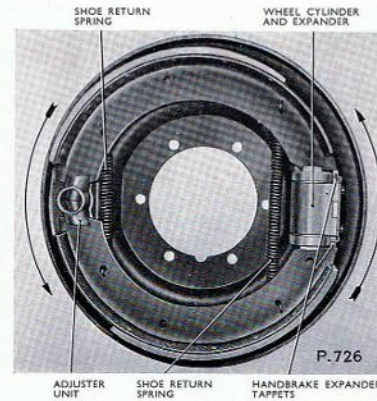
Front view of the KAH.30 and KAD.30 left hand (nearside) rear brake assembly. Arrows indicate the direction of drum rotation.
